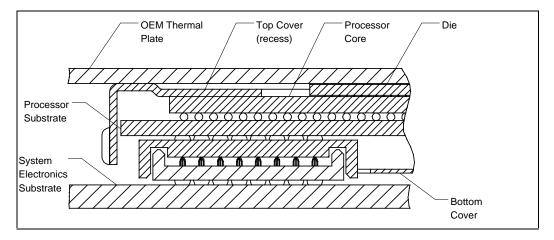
Mobile Pentium® II Processor Cross-sectional View
